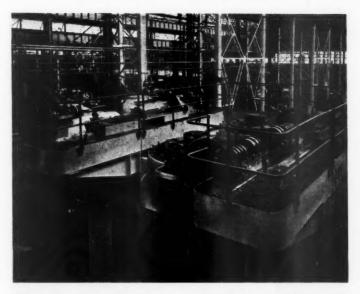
The screw-down gear on a new 66" wide three-stand tandem cold aluminium strip mill.
